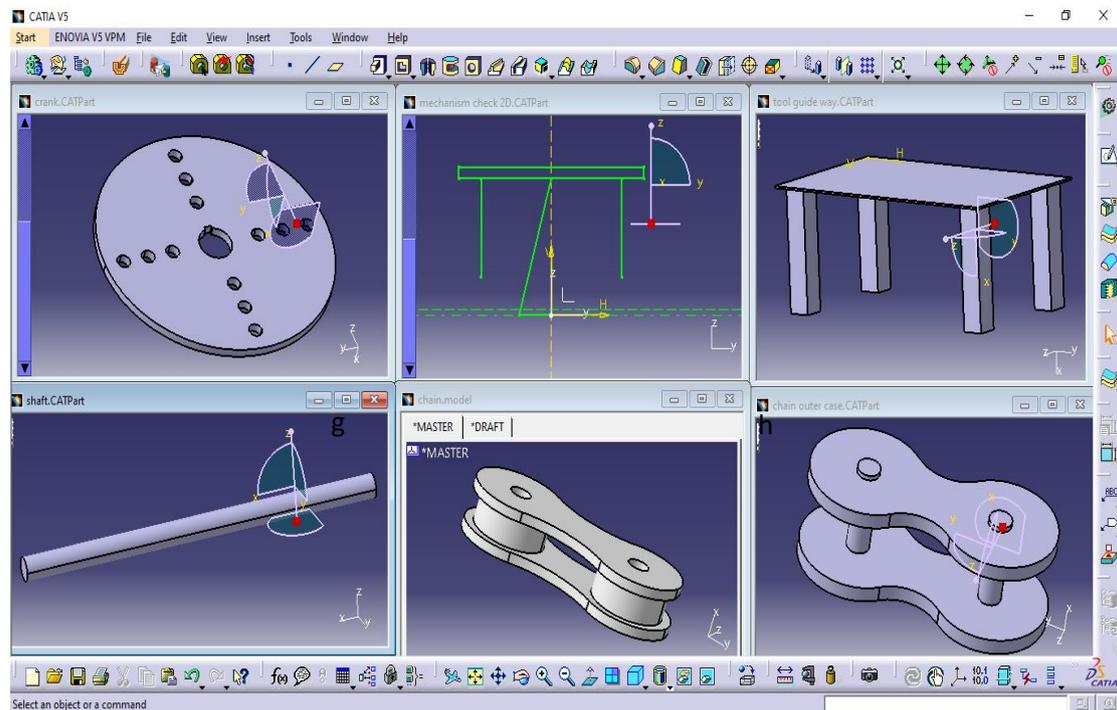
CAD models of parts g. Slider crank, h. slider-crank mechanism, i. Slider frame, j. Shaft, k. Chain roller plate, l. Chain Pin plate.
